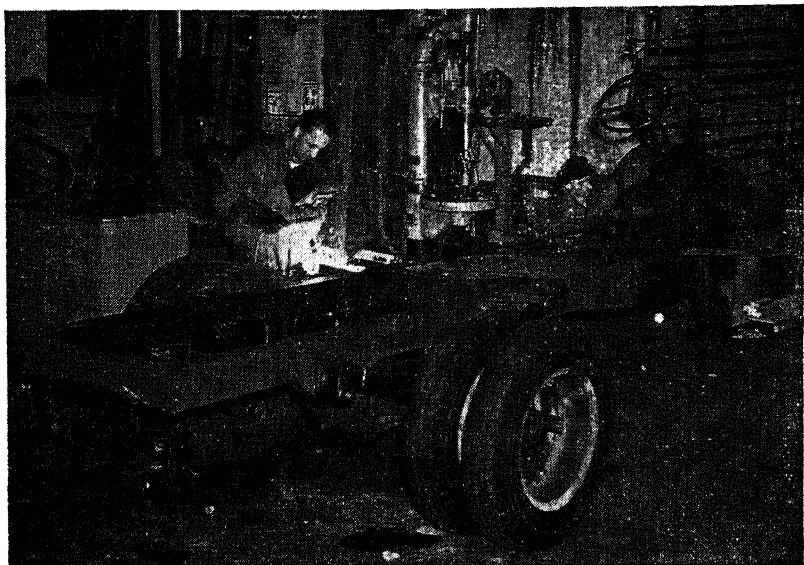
Fabricating 20-foot truck frame from 6-inch channel and salvaged parts of a fire-damaged truck. Total welding time 6 hours. Saved \$75 over riveted construction.
